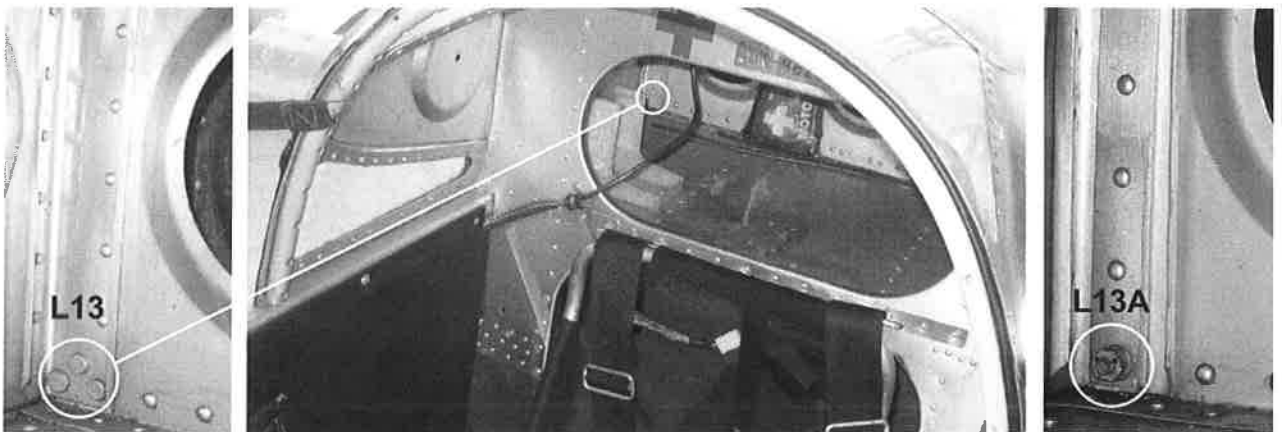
Mounting of wing lower attachment behind midsection rib (frame 6a in fuselage)
